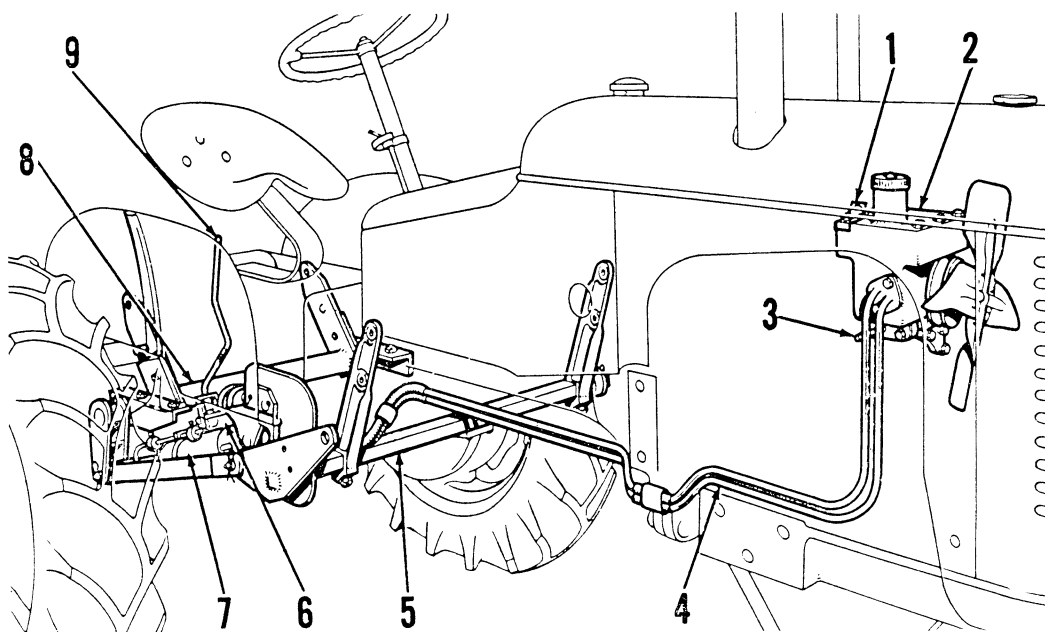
Phantom view showing installation of hydraulic power lift system on Massey-Harris Pony tractor.
